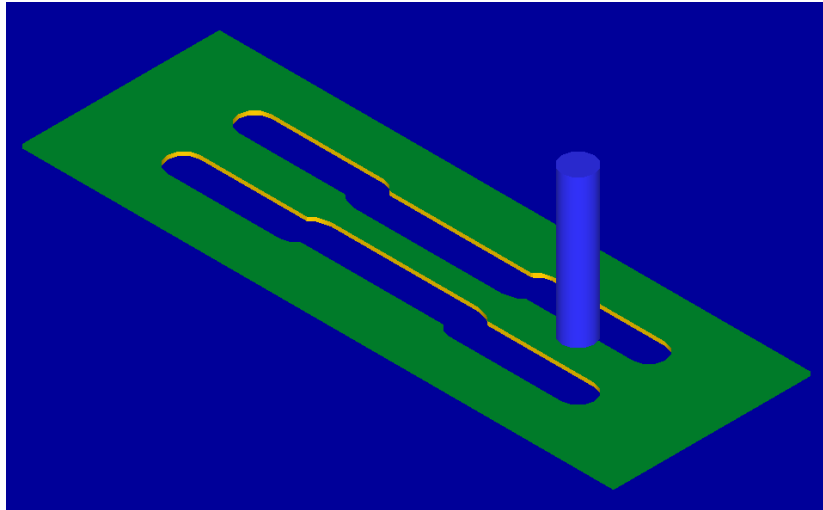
CNC Milling Process Simulation using Mastercam's
